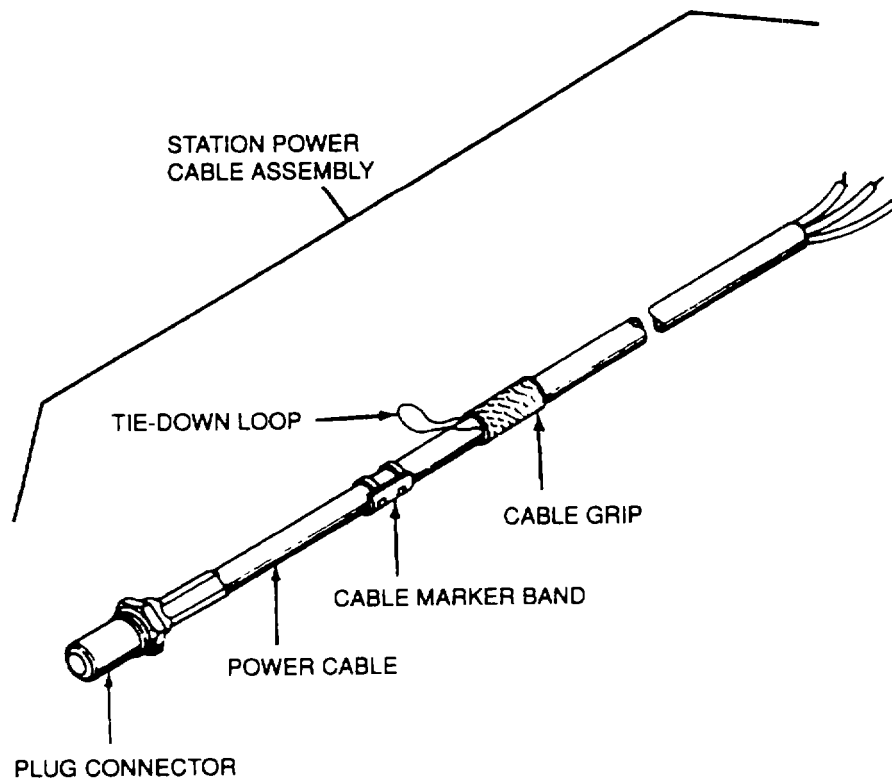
Cable Assemblies (Sheet 1 of 2)
